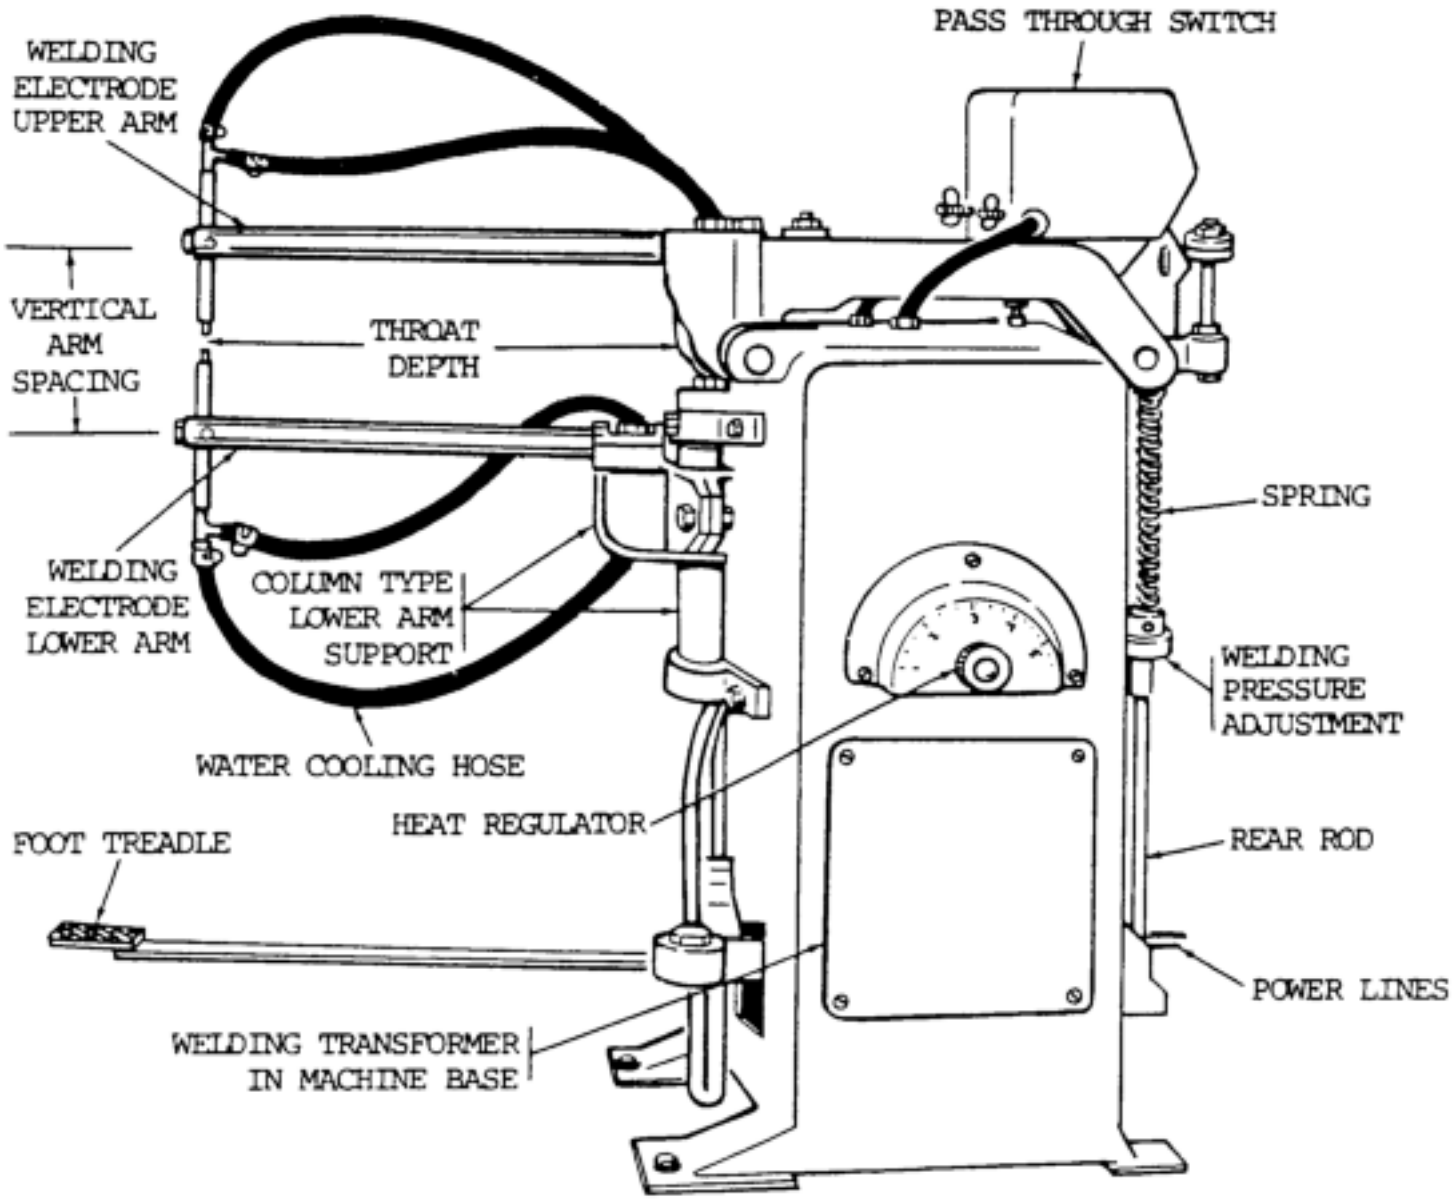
Resistance spot welding machine and accessories.
